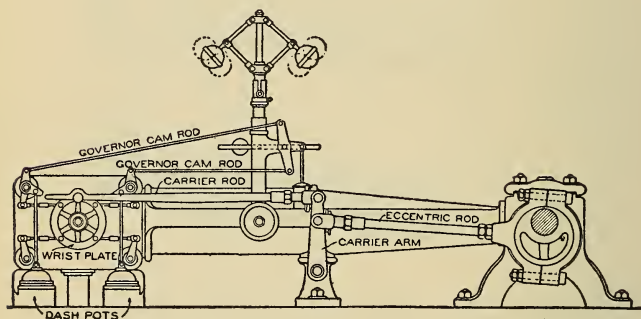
Reynolds-Corliss engine; view showing valve gear.
